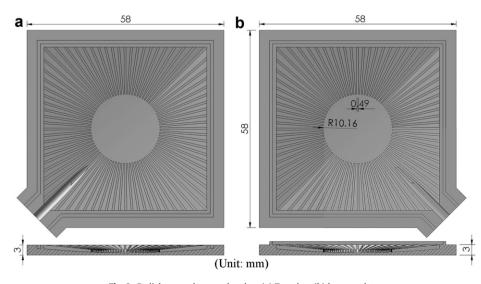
Radial grooved vapor chamber. (a) Top plate (b) bottom plate.
